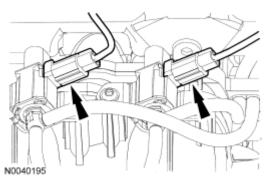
Locating Swirl Control Valve Electrical Connectors Courtesy of FORD MOTOR CO.
